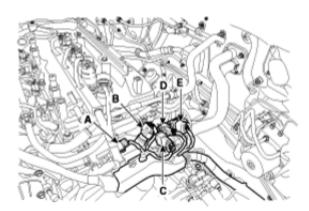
Identifying PCSV Connector And ECT Sensor Connector Courtesy of HYUNDAI MOTOR CO.
